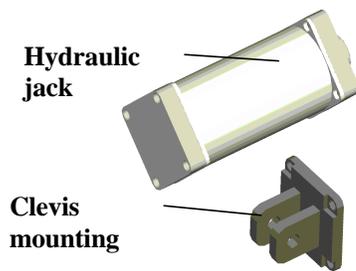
Hydraulic jack and clevis mounting CAD parts
